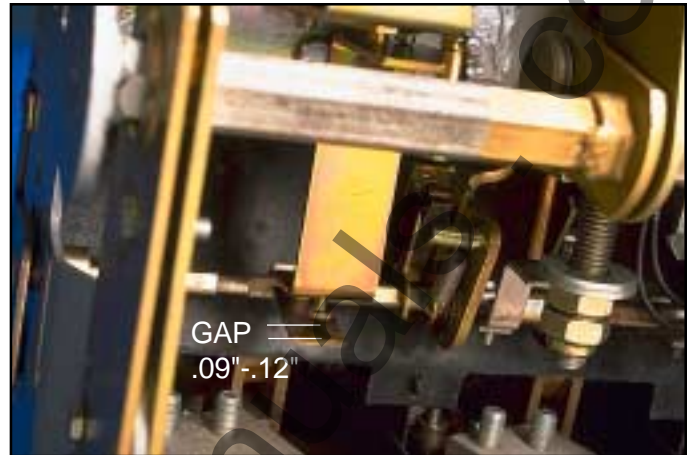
Adjusting the Gap Between the Trip Finger and DTA Gap Adjusting Screw.
